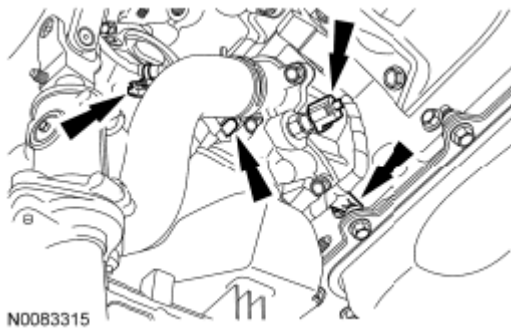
Locating Engine Oil Pressure (EOP) Switch Electrical Connector
